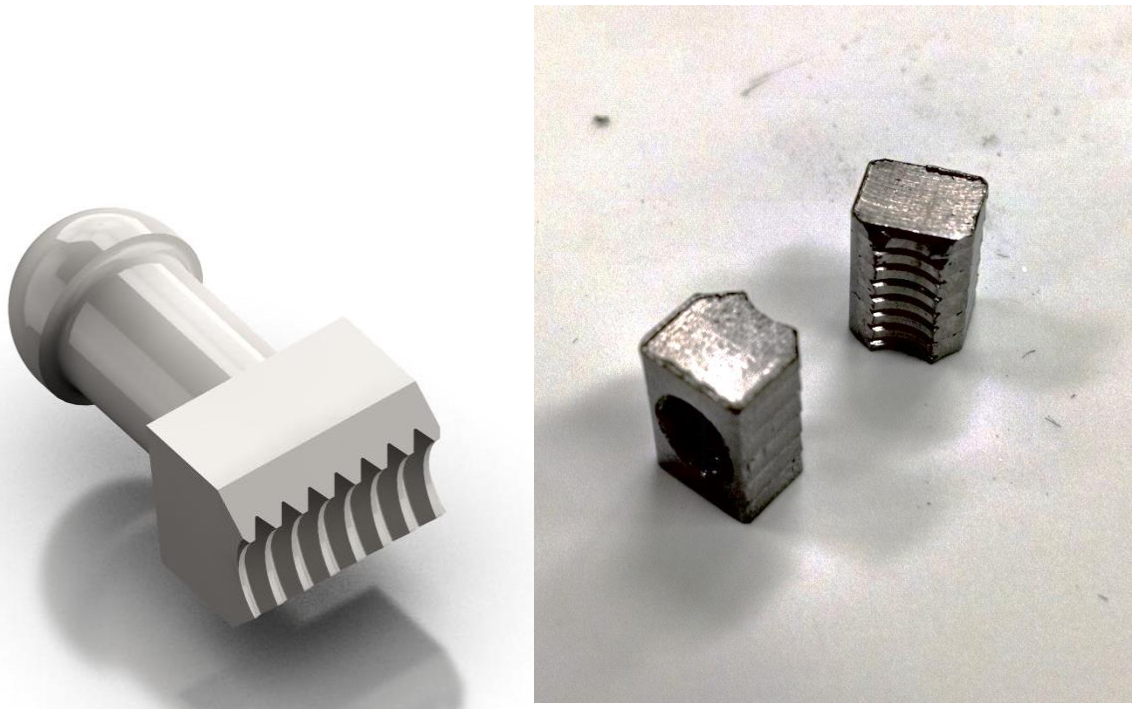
CAD rendering of pinch thread insert (left) and interchangeable thread piece (right)
